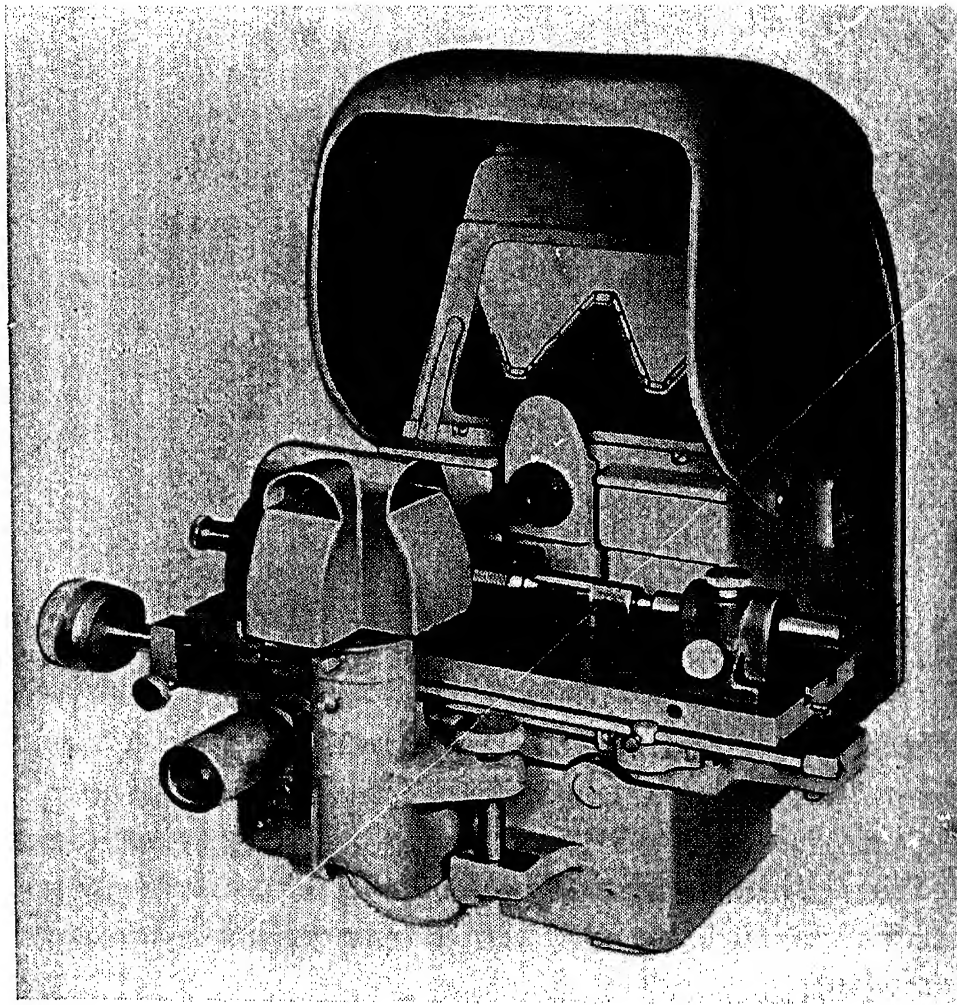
A screw thread shadow cast on the screen of a projection comparator. (Courtesy Jones and Lamson Machine Co.)
